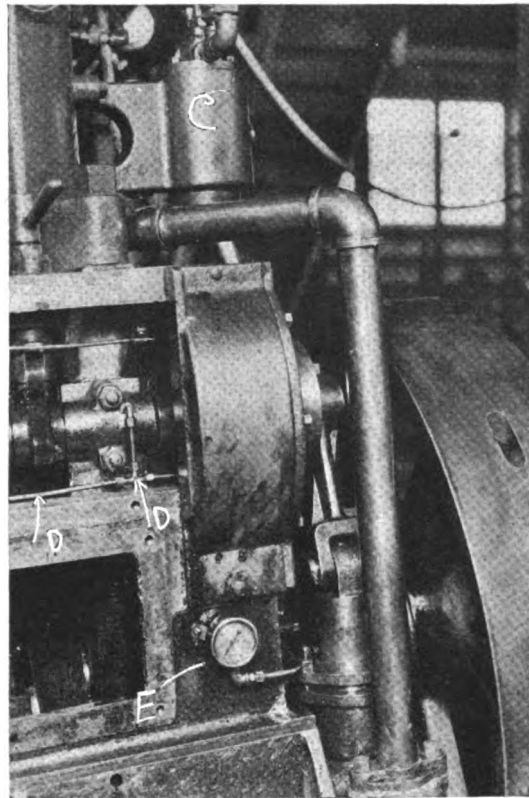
View showing lubricating arrangement of camshaft bearings
